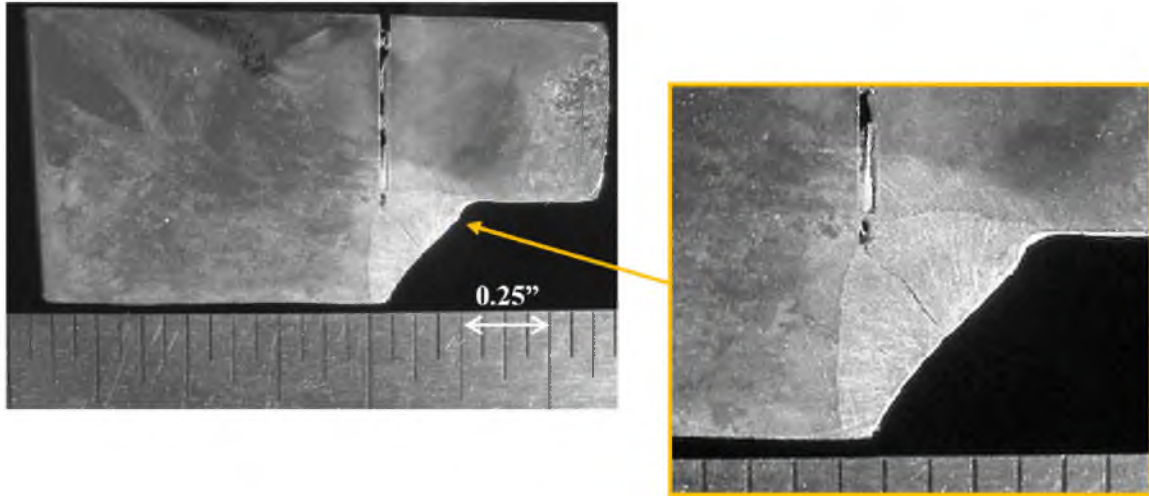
Surface B, right section of crack 3 spoke to rim weld (original at 5X)
